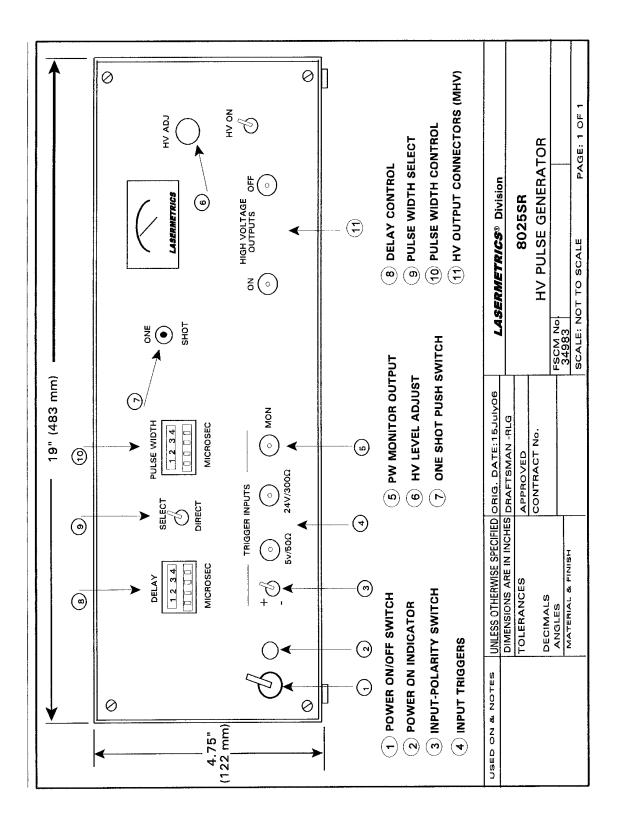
8025RS FRONT PANEL AND DIMENSIONS
